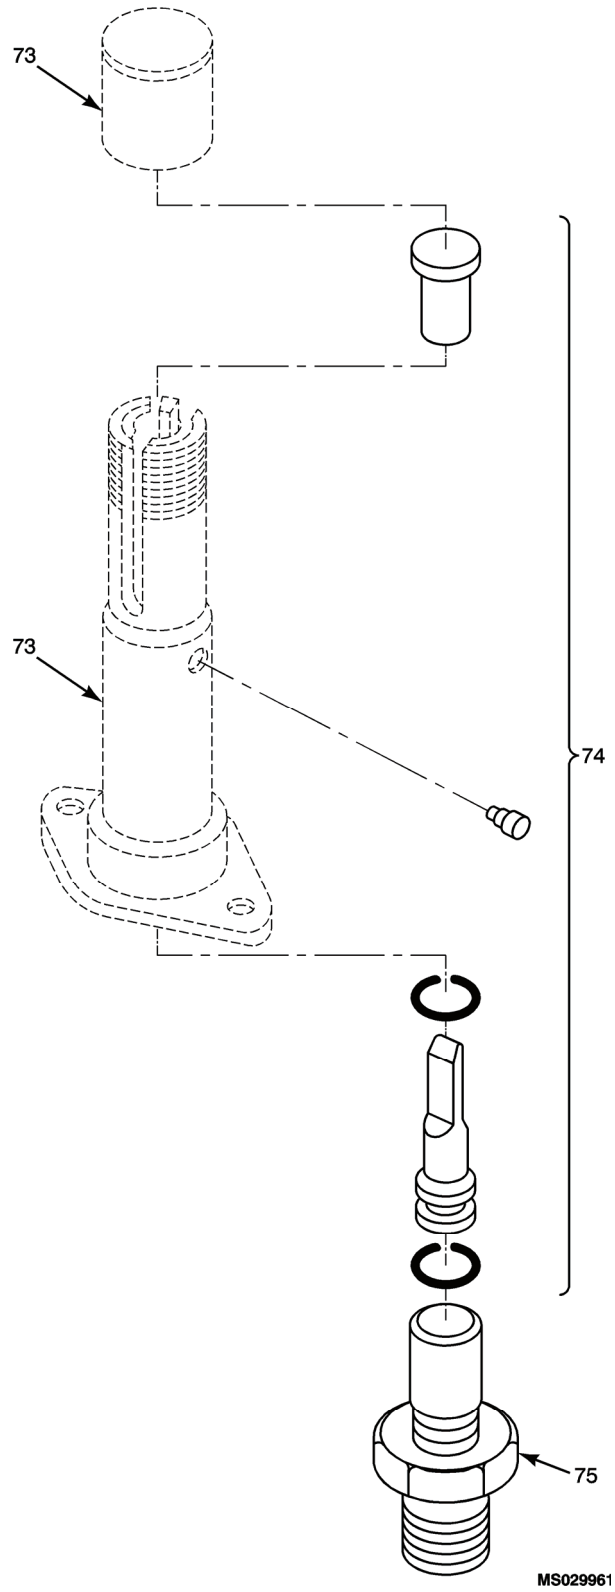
Boomhead Assembly – Cable Cutter P/N 42277E336. (Sheet 4 of 5)
